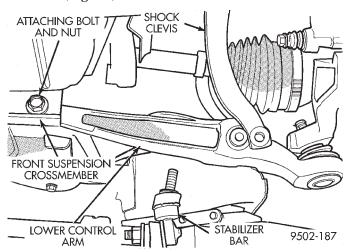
Attaching Front Of Lower Control Arm To Suspension Crossmember
